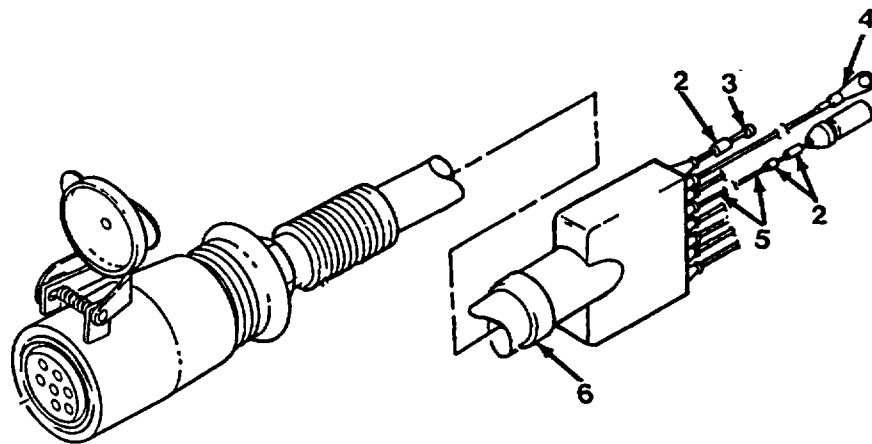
INTERVEHICULAR CABLE ASSEMBLY.
